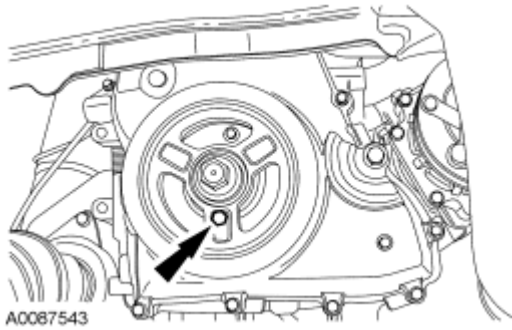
Aligning Crankshaft Pulley Bolt Holes
